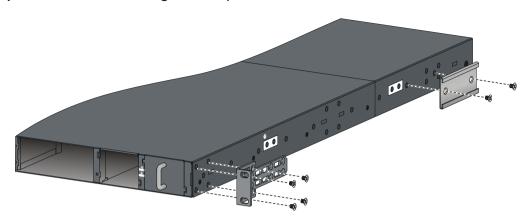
Attaching the mounting brackets and chassis rails to the HPE 5930-4Slot/HPE 5930-4Slot TAA switch (power supply-side mounting position for the mounting brackets)
